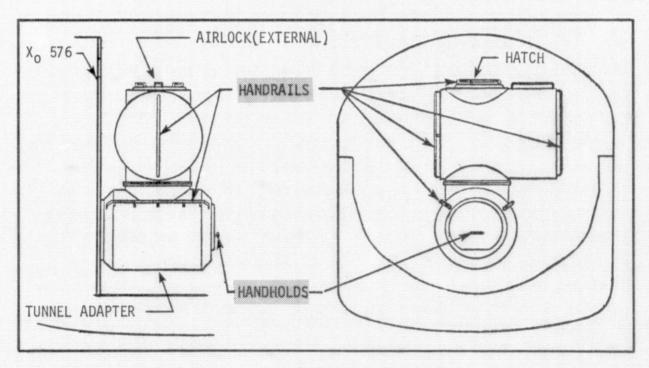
EVA Handrails on External Airlock and Tunnel Adapter (Concept)
